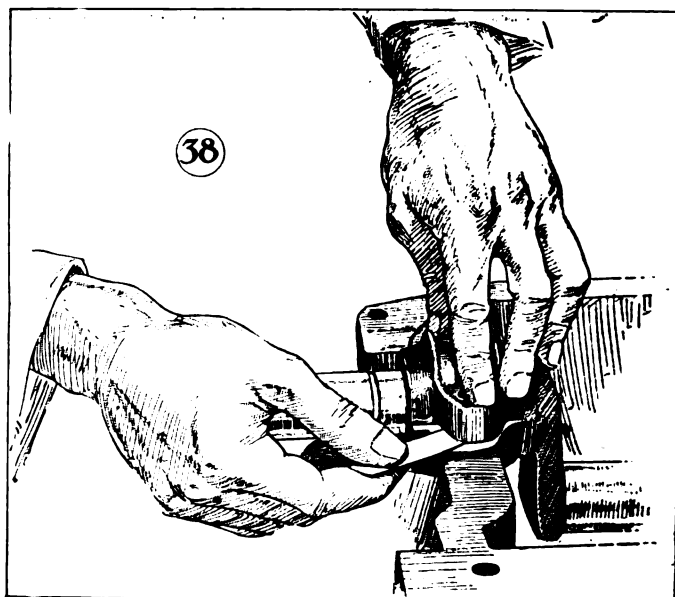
The rock of the caps should be tested with a feeler gage or piece of shim steel
